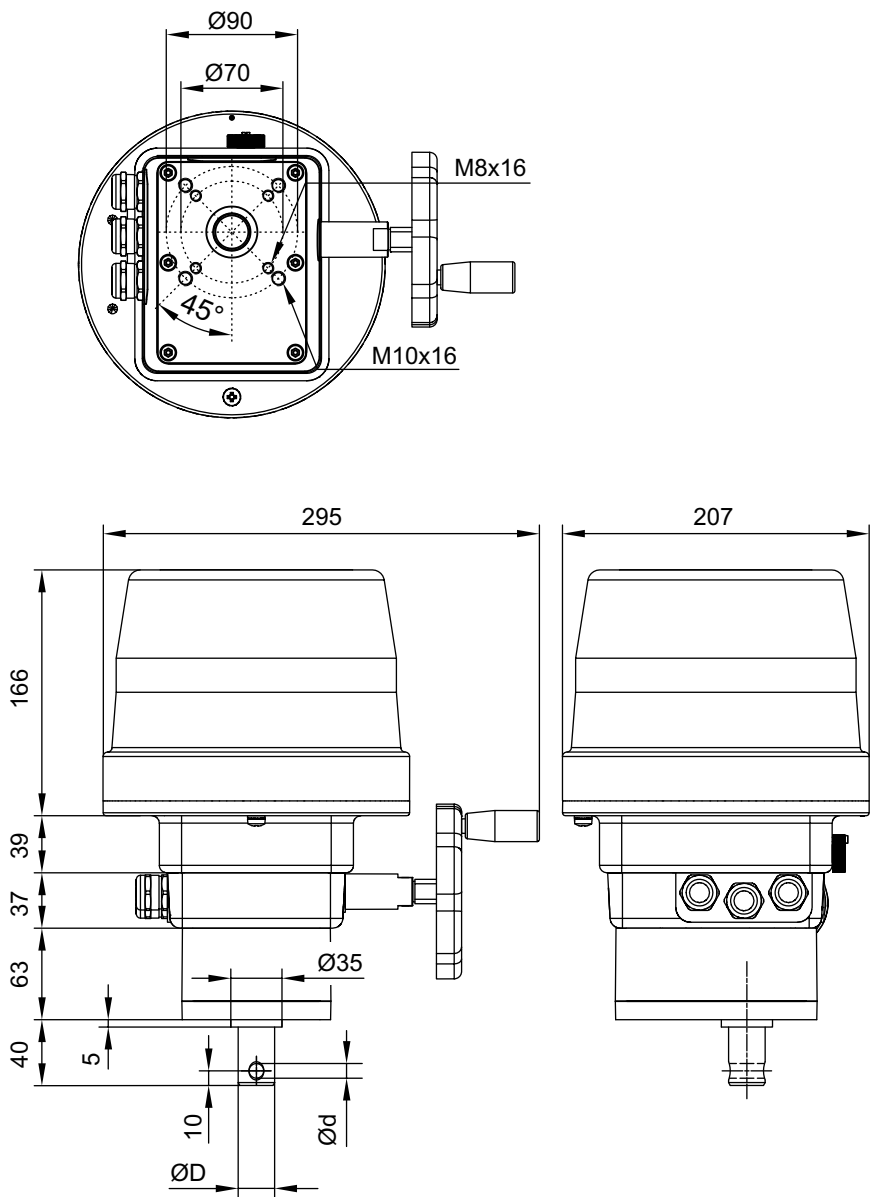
Series NEx5 to NEx6 – assembly dimensions
